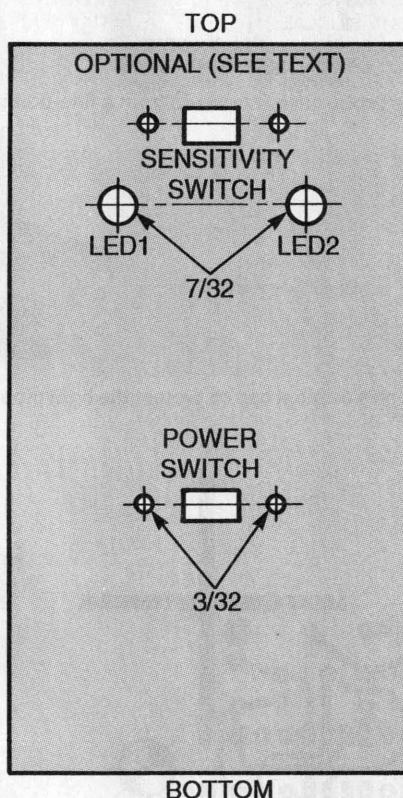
DRILL GUIDE. S2 is optional, so don't drill holes for mounting it if you're not using it.
